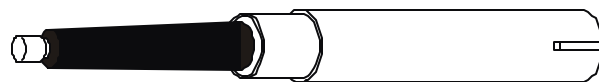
7 Liner-Removal Tool (P/N N610-0102)
